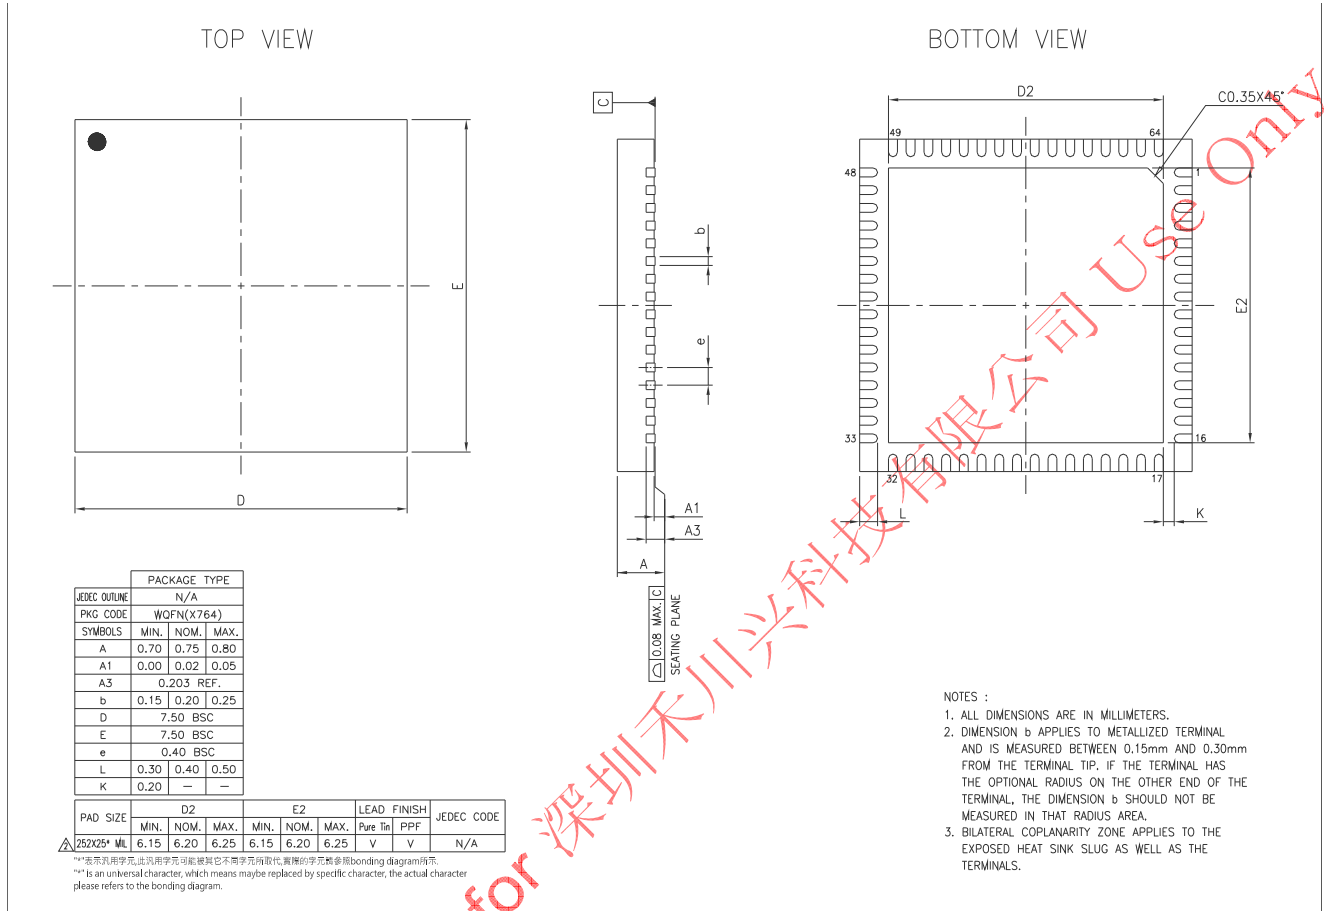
LT6711A QFN64 7.5mmx7.5mm Package
